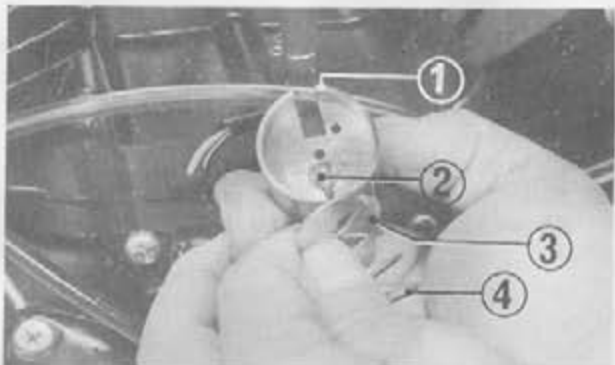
(1) Throttle valve (3) Clip plate
